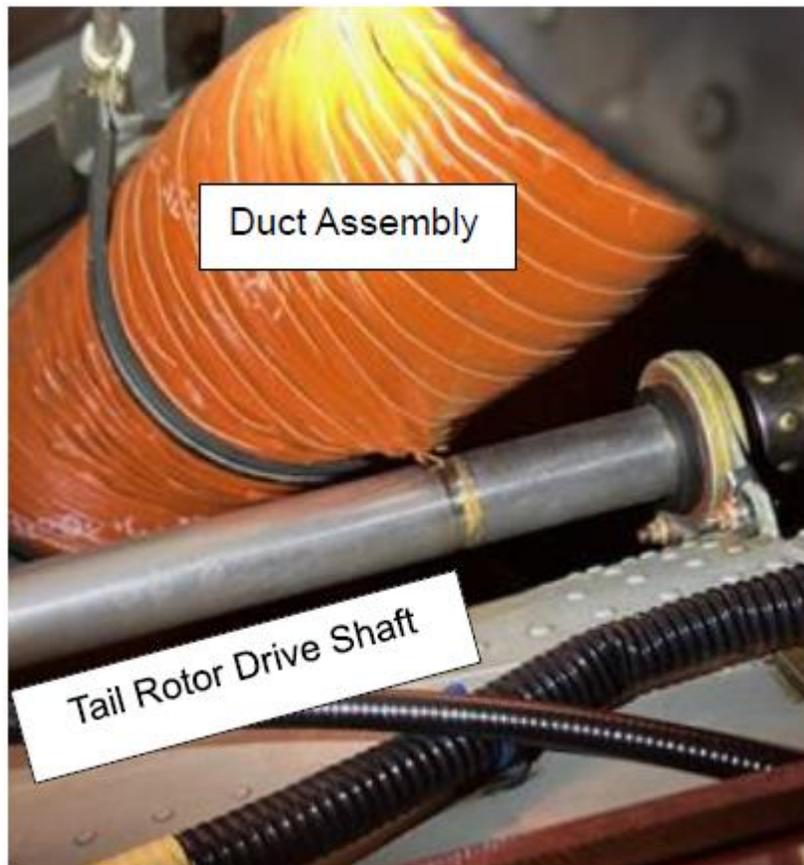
Typical Damage with Low Positioned Clamp Shown
